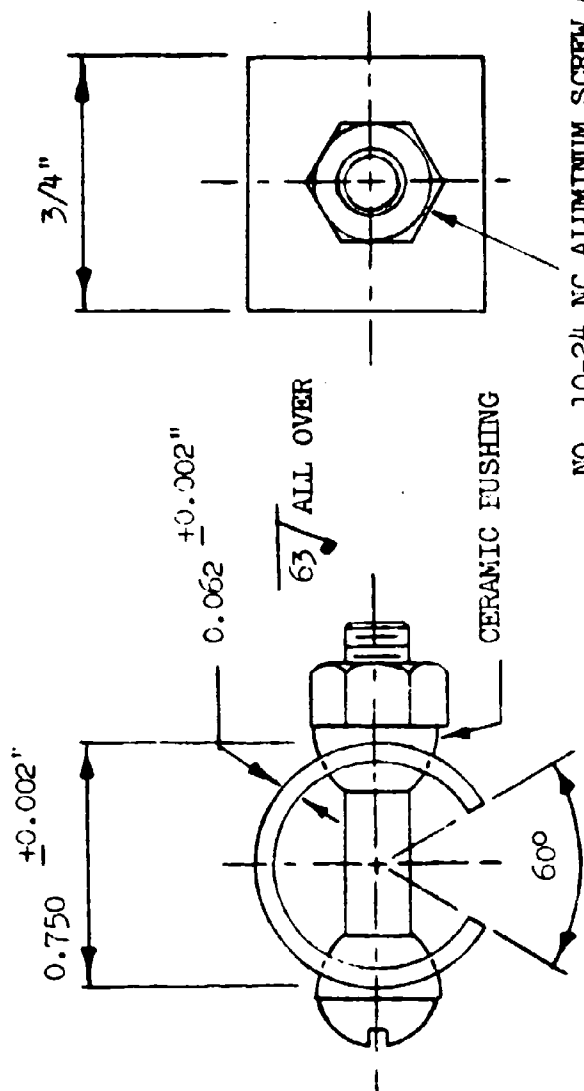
C-RING ASSEMBLY FOR SHORT-TRANSVERSE STRESS-CORROSION TESTS
